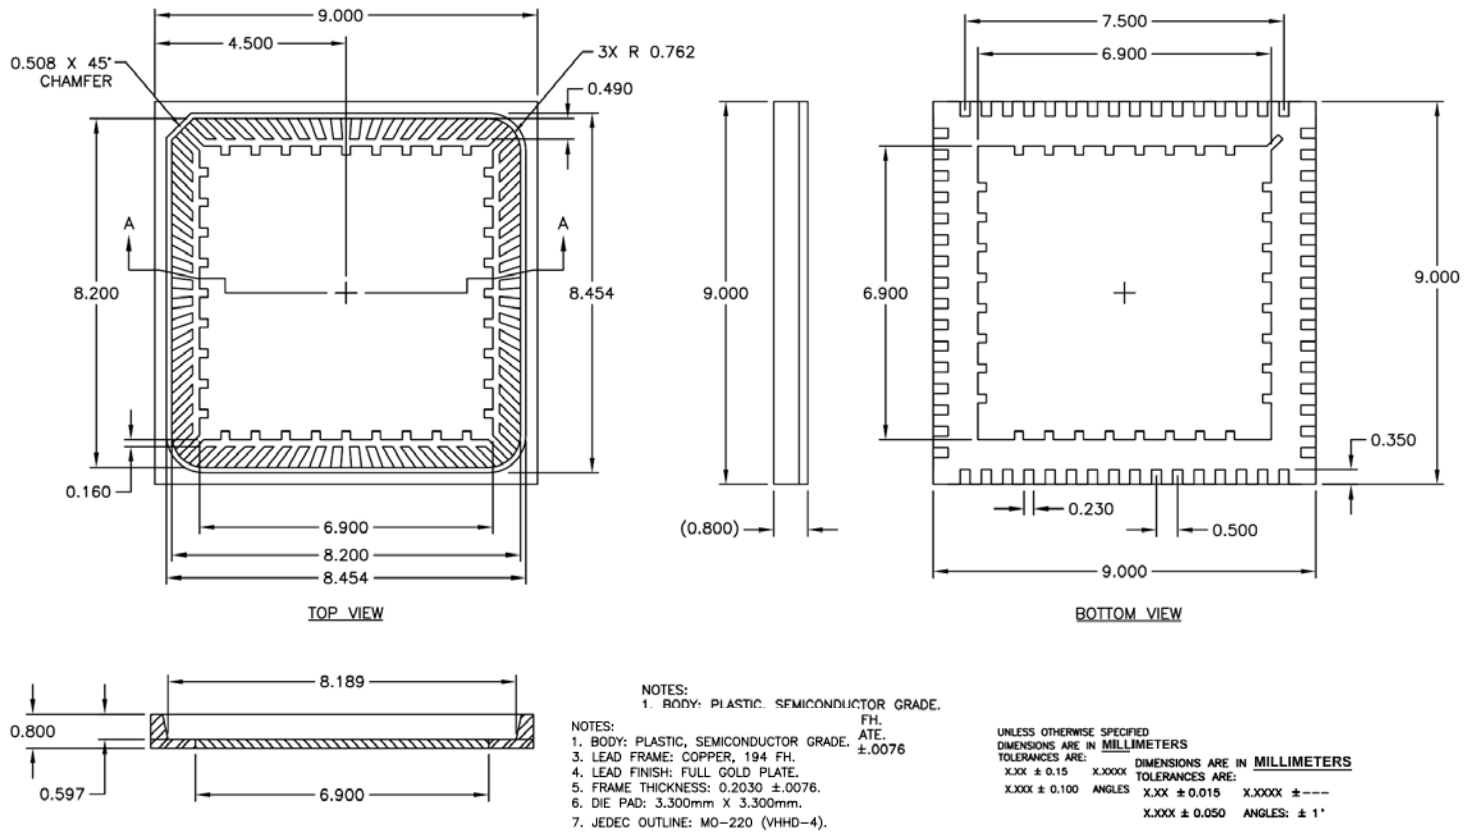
64-Lead QFN packaging outline. Dimensions shown in millimeters. Packaging provided by SEMPAC, INC.
